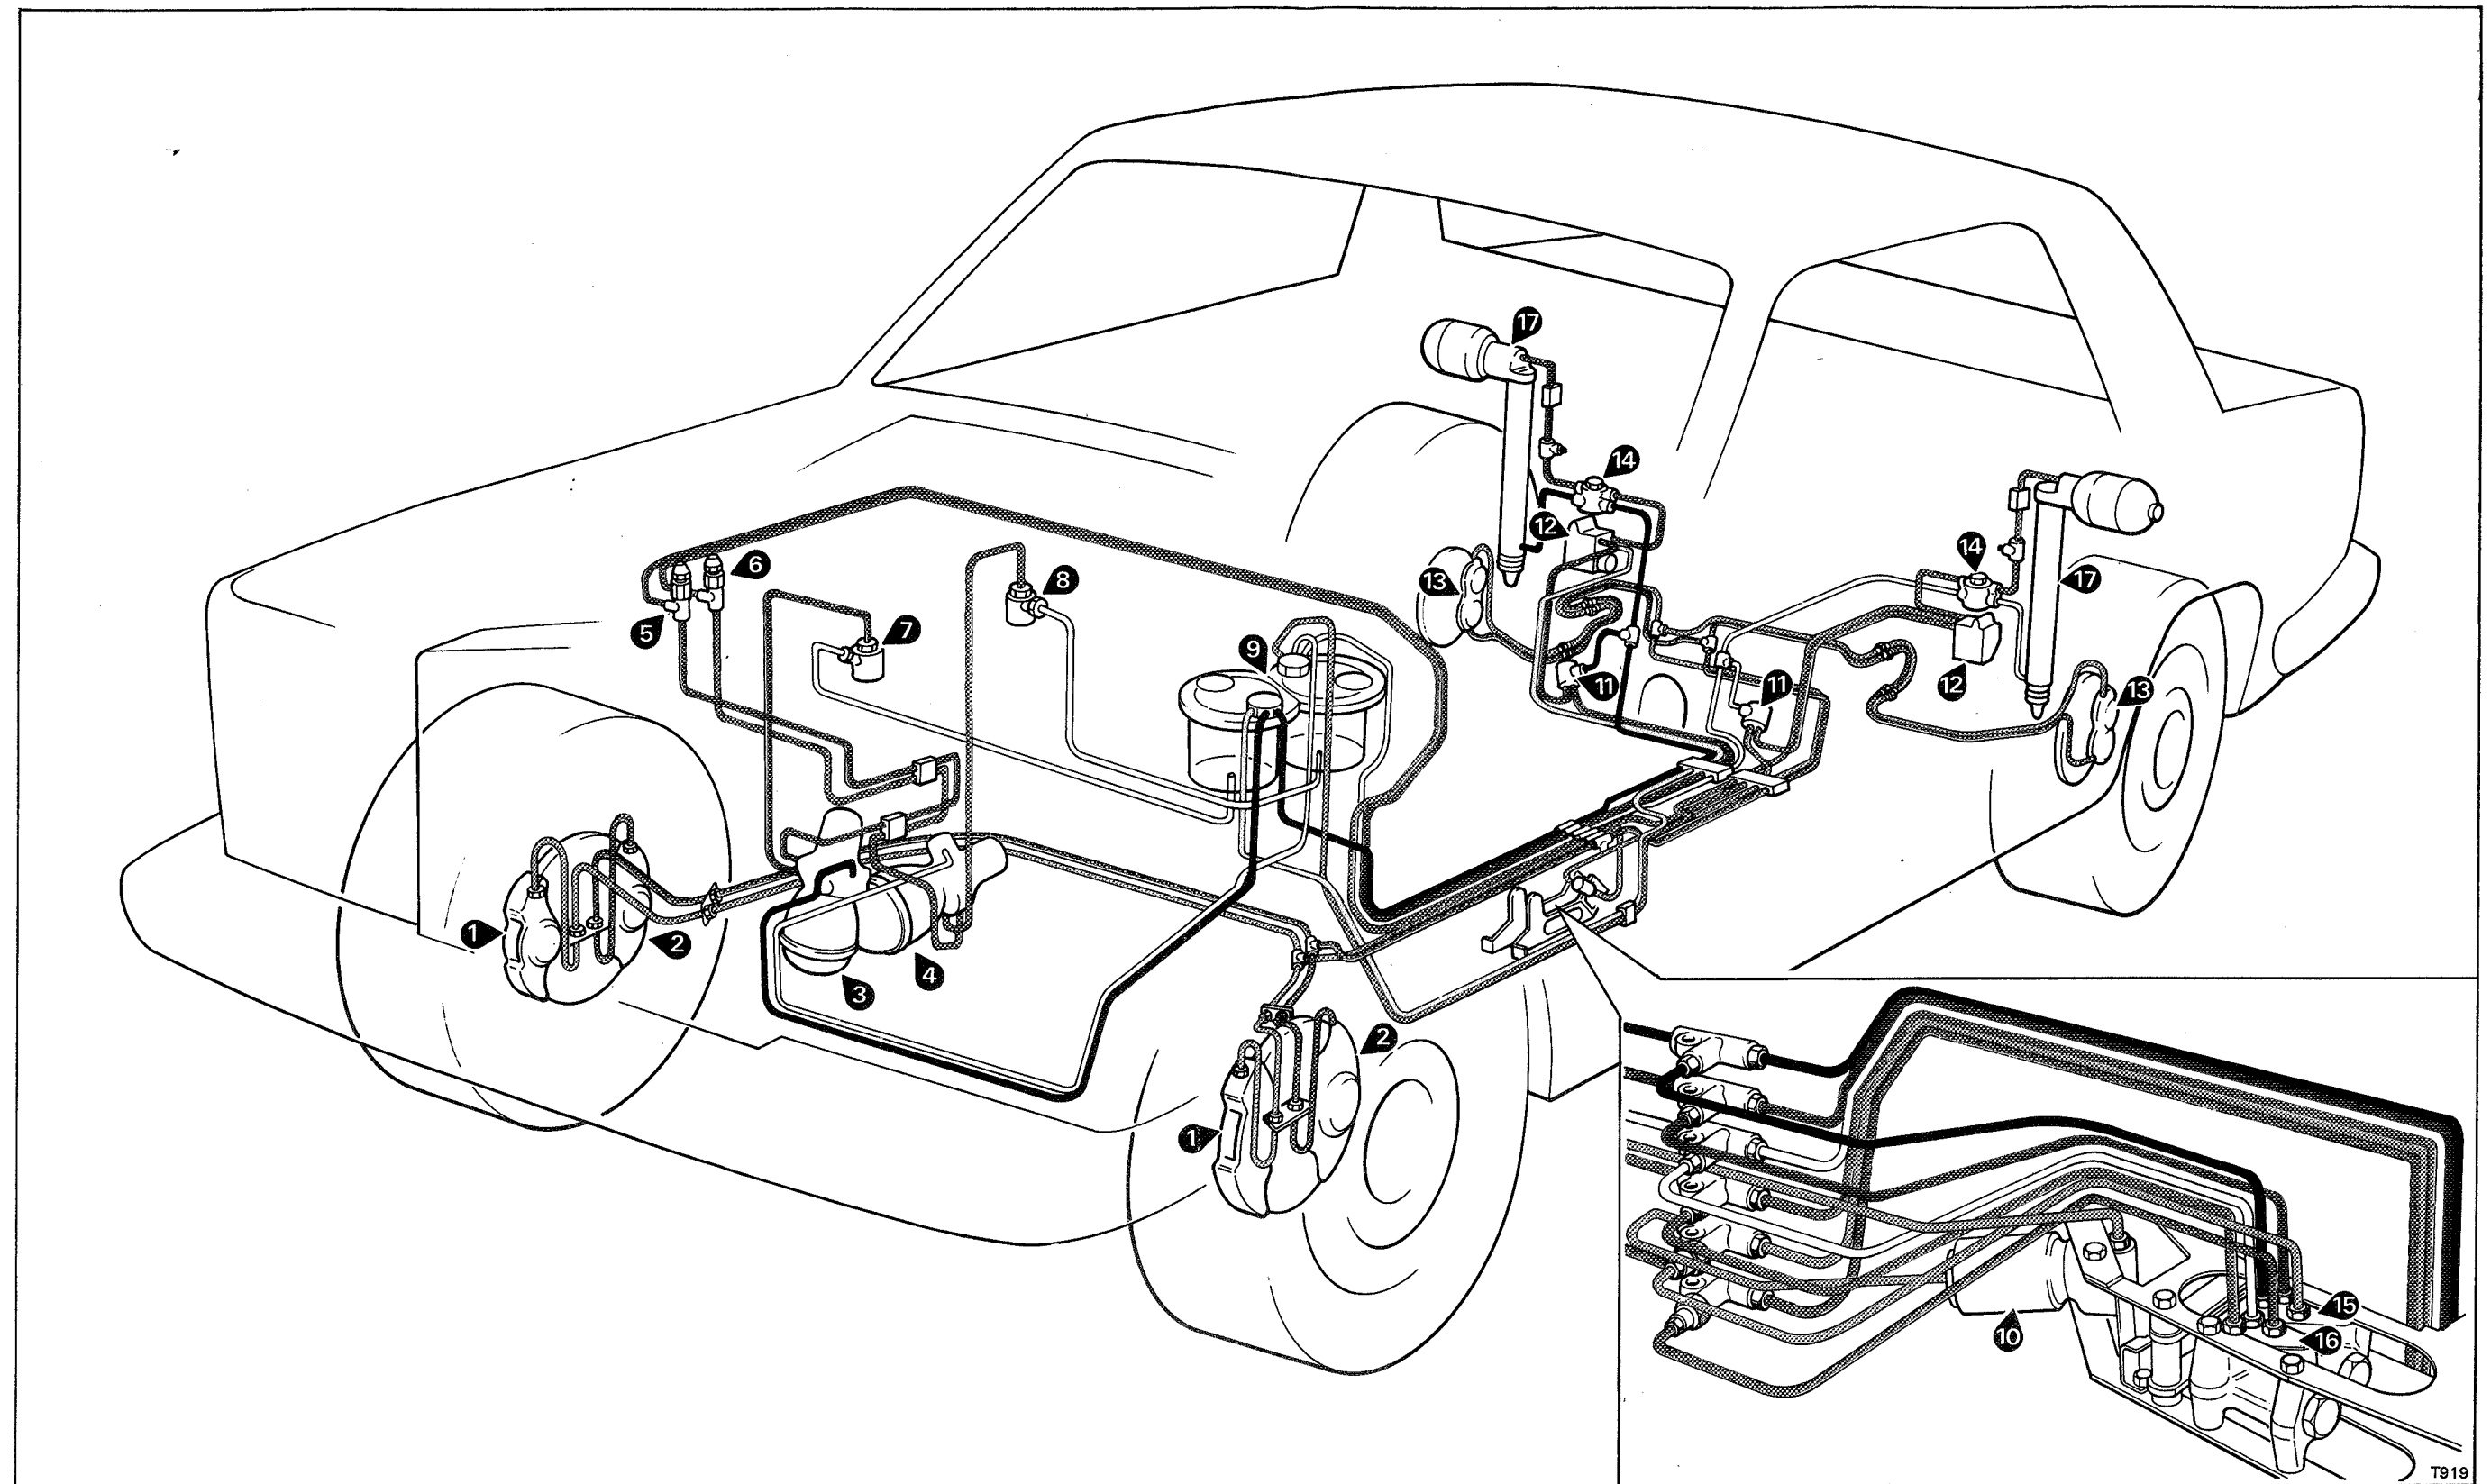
Mineral oil hydraulic system colour coding and component location (Left-hand drive cars)
